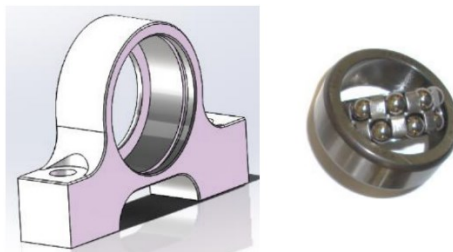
Drawing of bearing holder and image of self-aligning bearing
